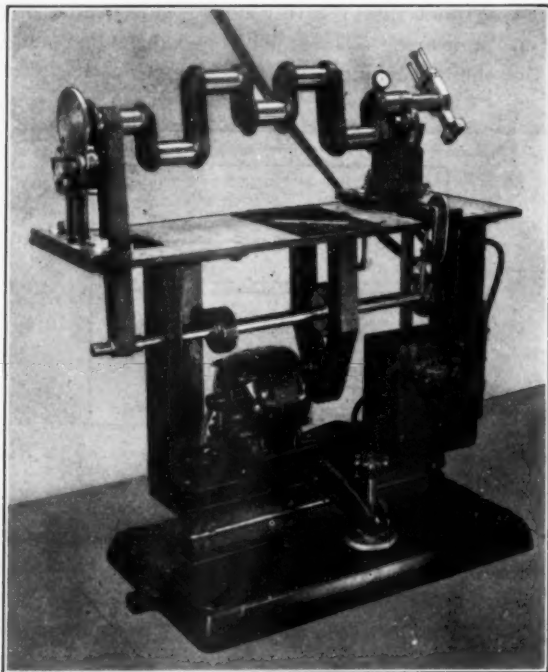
COMBINED STATIC AND DYNAMIC BALANCING MACHINE
